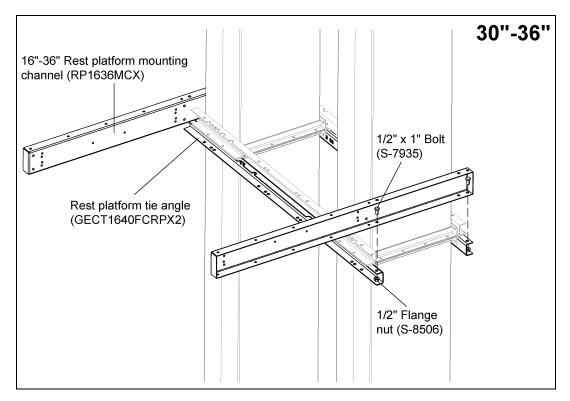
J Bolt hole locations for 30"-36" rest platform mounting channels to tie angles.
